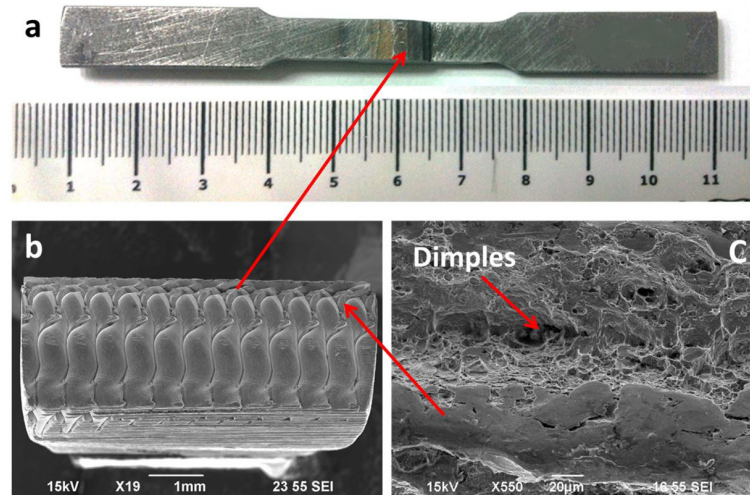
(a) Lap-shear tensile test specimen used to characterize the fracture of TRIP 780 steel; (b) Overall view of the fracture surfaces; (c) fracture appearance with uniformly distributed elongation shear dimples.
